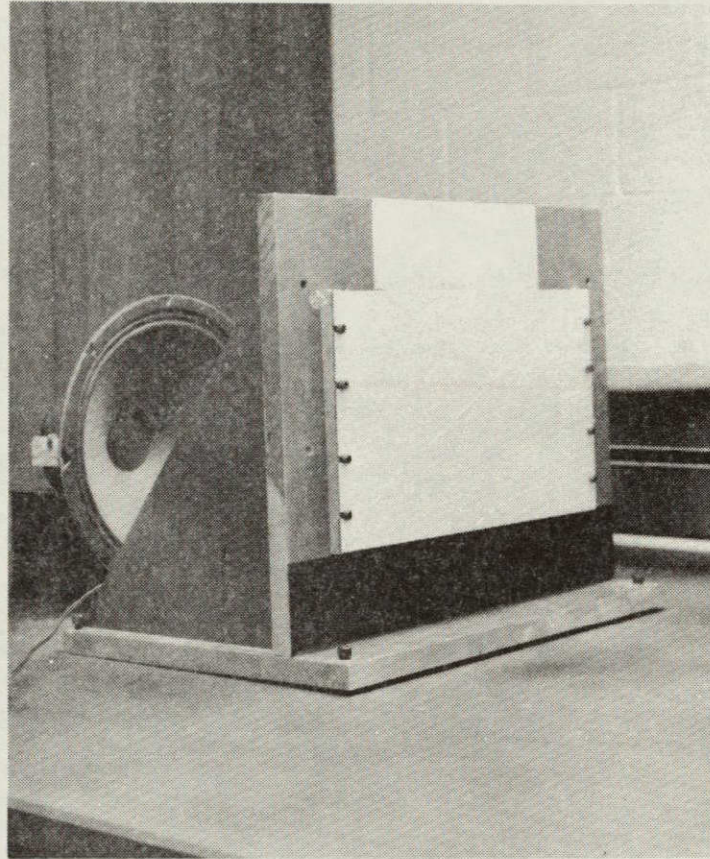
Holding Fixture for Rectangular Steel Panel
